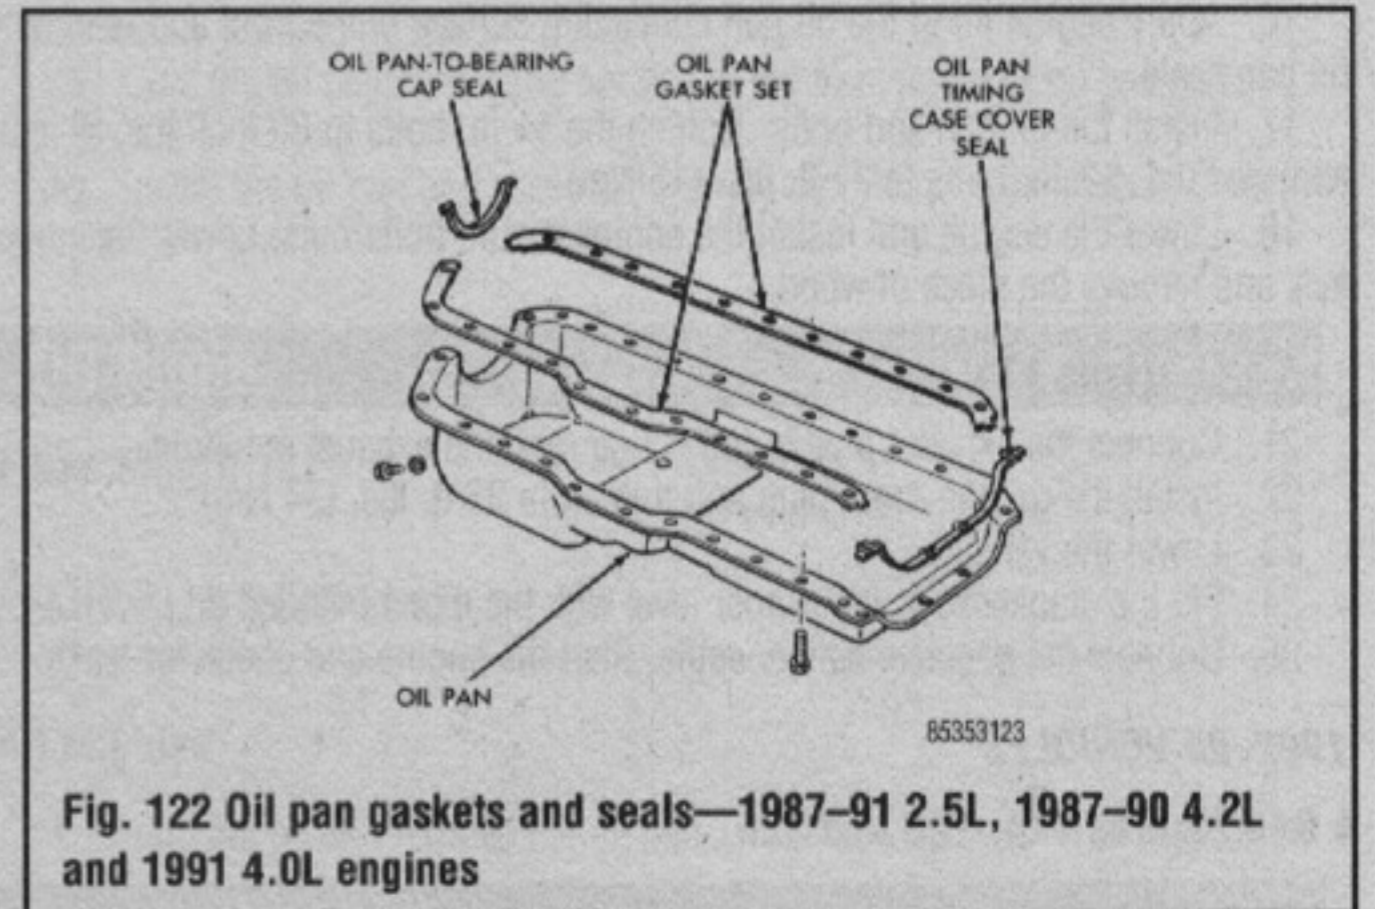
Oil pan gaskets and seals—1987-91 2.5L, 1987-90 4.2L and 1991 4.0L engines
